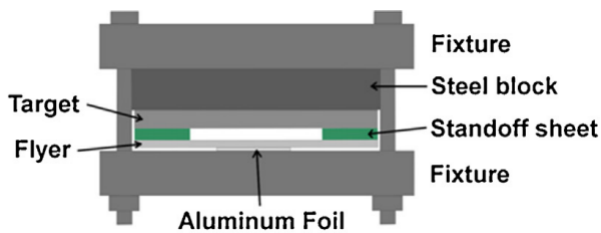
Scheme of the vaporizing foil welding apparatus [29].
